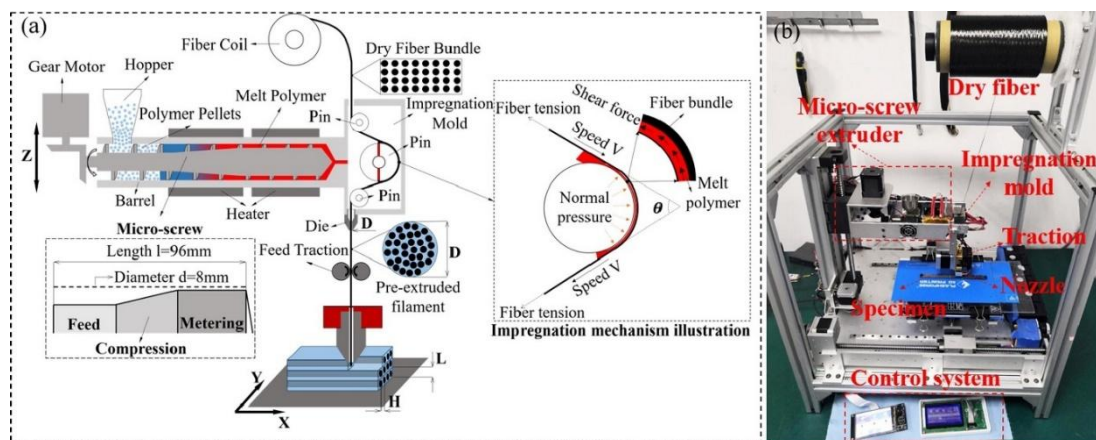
Schematic (a) and equipment (b) of micro-screw in-situ extrusion based 3D printed continuous fibre reinforced composites adapted from [89].
